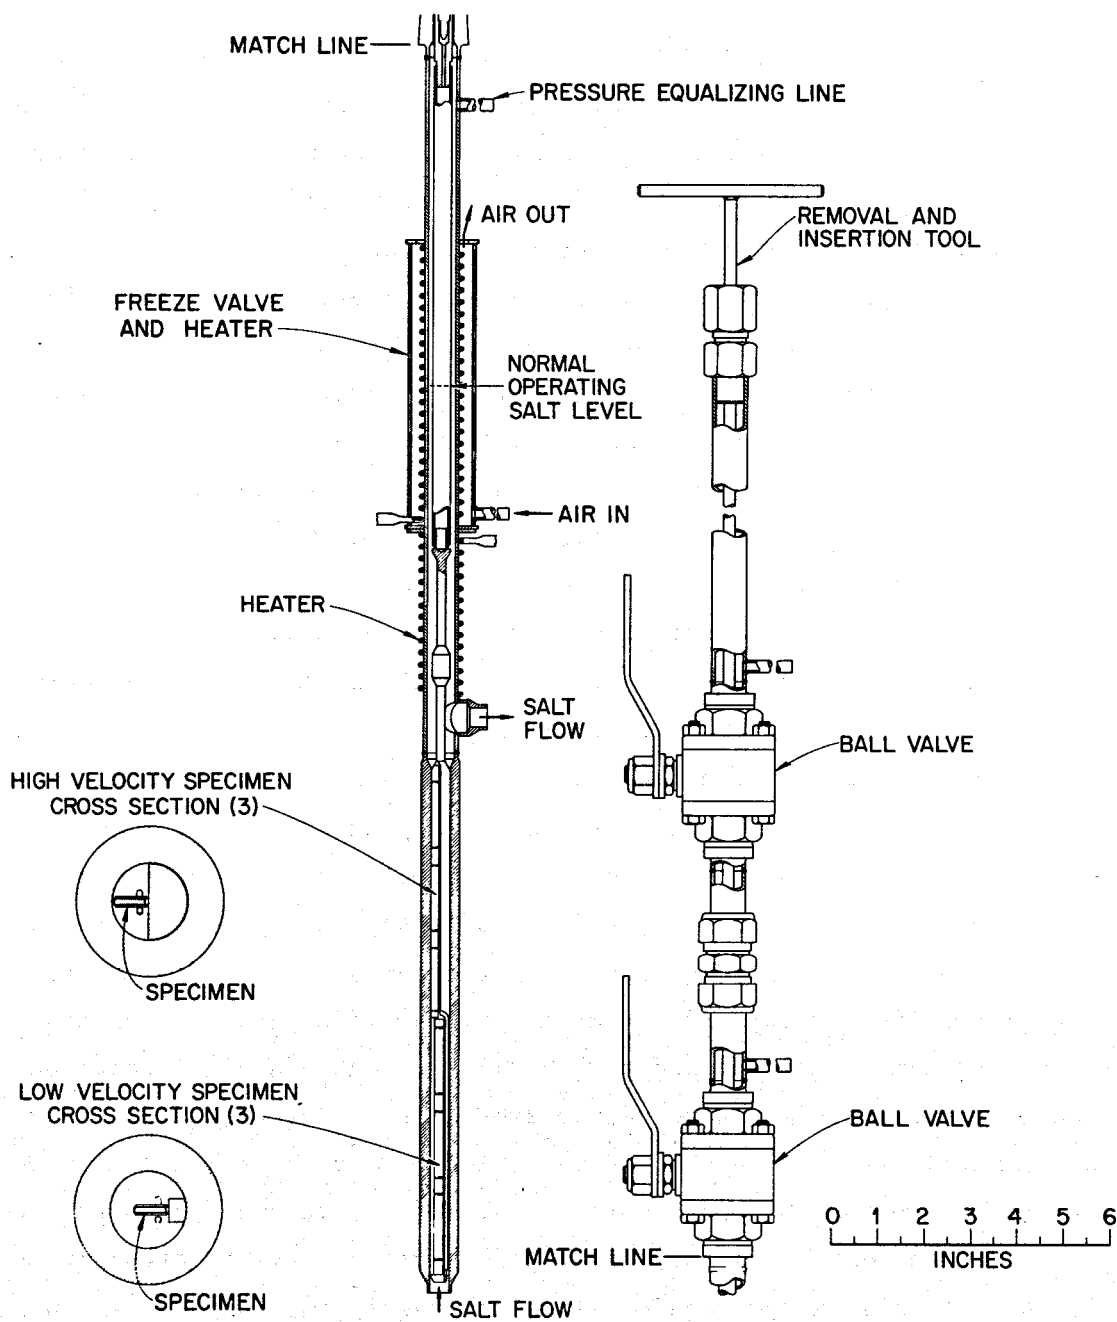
Corrosion specimen installation and removal system for MSR-FCL-3 (1 in. = 25.4 mm).
